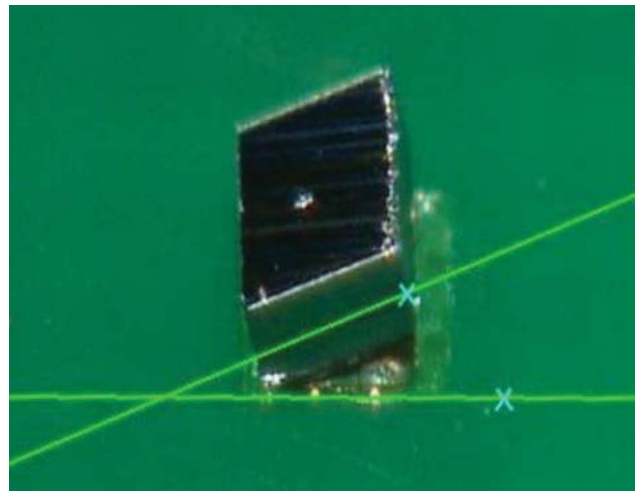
Soldered unit with 5 to 20 degrees of tilt on the PCB
